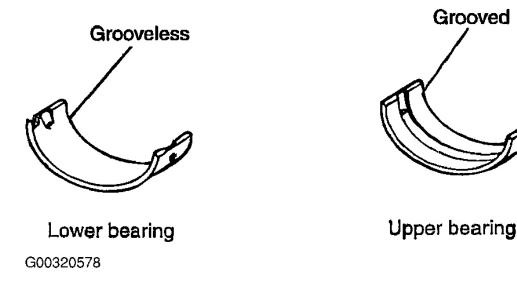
Identifying Main Bearings Courtesy of KIA MOTORS AMERICA, INC.
